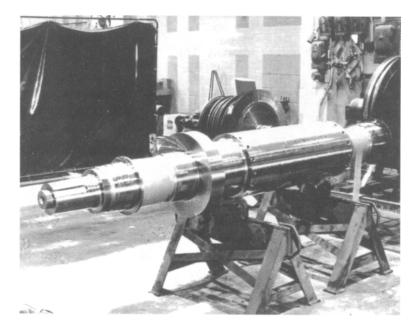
Finish-machined shaft showing integral thrust collar. The rotor is a stiff-shaft design.
